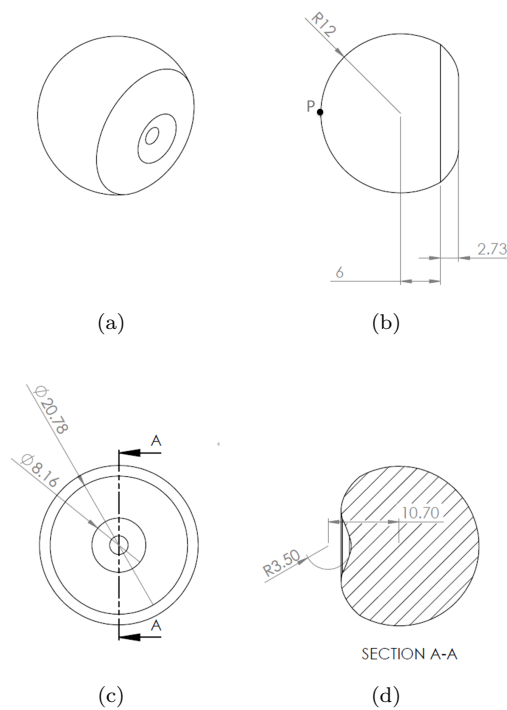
Computational model of the vitreous cavity: (a) 3D view; (b) side view; (c) front view; (d) midplane view based on section A-A presented in (c). All the dimensions are in millimetres.
